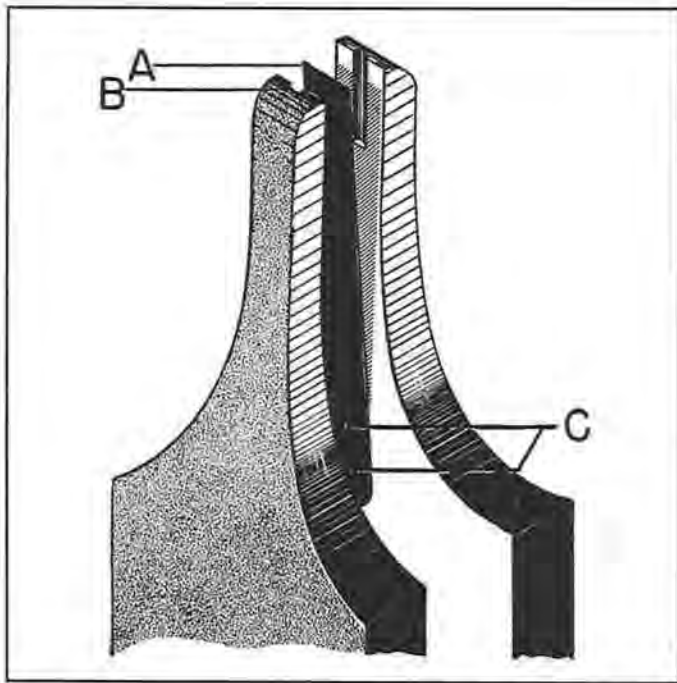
Special tweezers are necessary like these shown for adjusting pins in a Breguet regulator.
